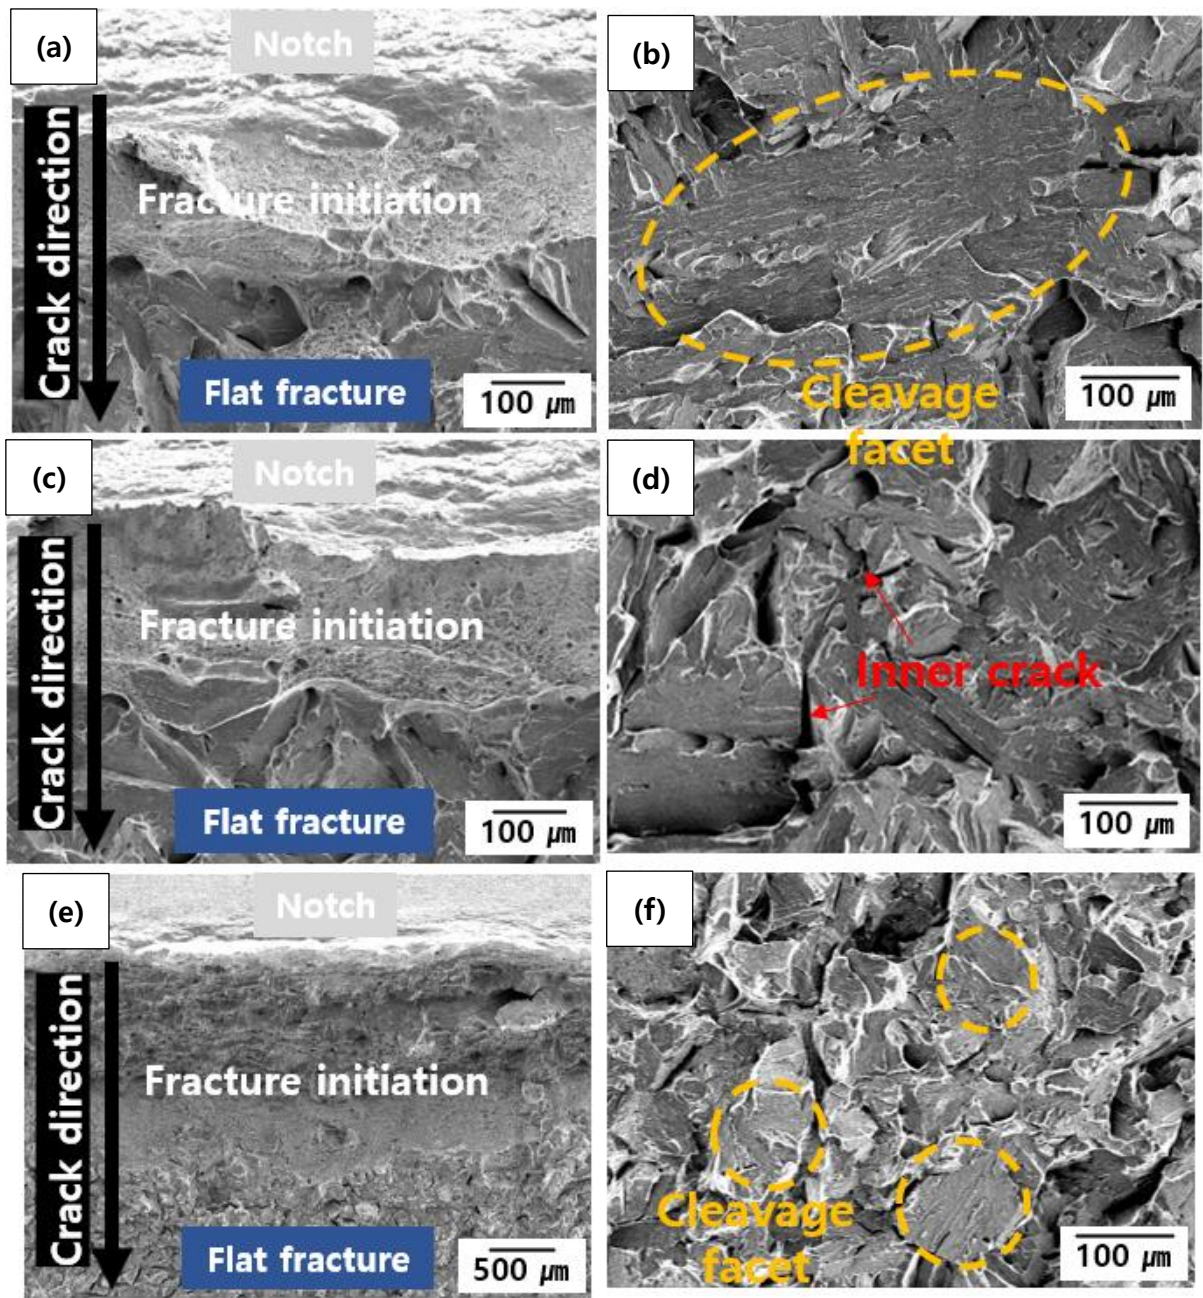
SEM fractographs showing overall fracture appearance of (a) ICG-F, (c) ICG-M and (e) ICG-S specimen, SEM fractographs showing flat fracture region in (b) ICG-F, (d) ICG-M and (f) ICG-S Charpy impact specimen
